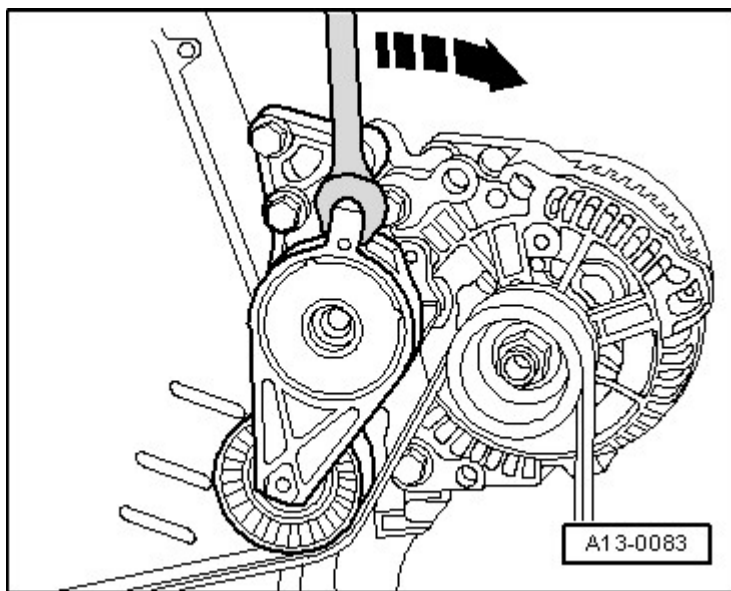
Identifying Method To Relieve Tension On Poly V-Belt
